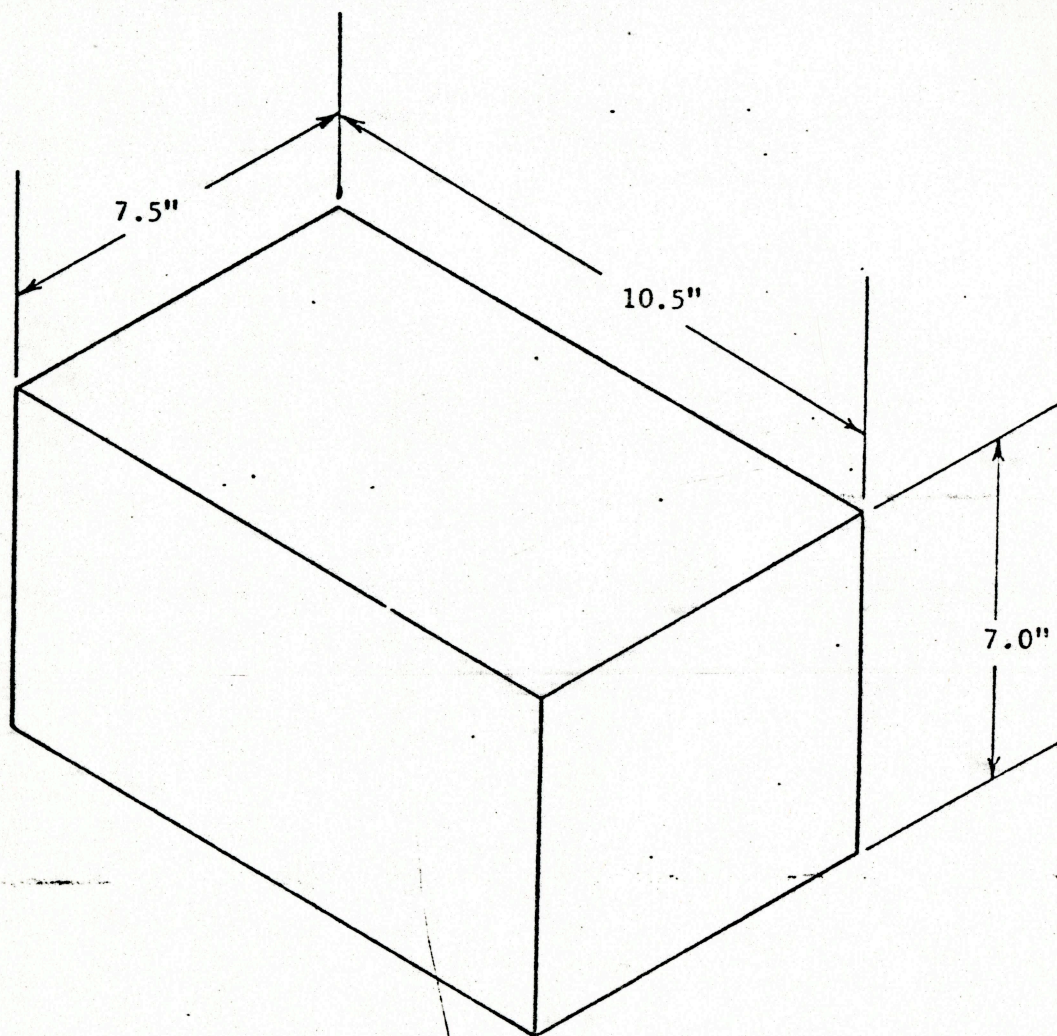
M133 Panel Assembly - Stowed Dimensions (1 item)
